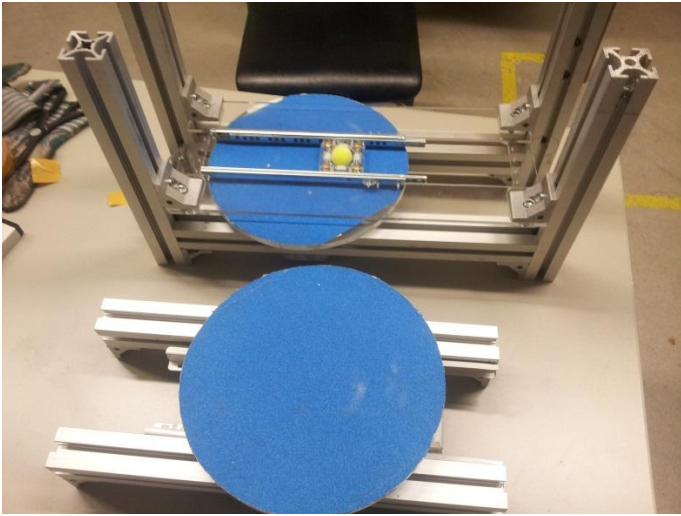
The next step consists on mounting the bottom disc assembly on its slide.
